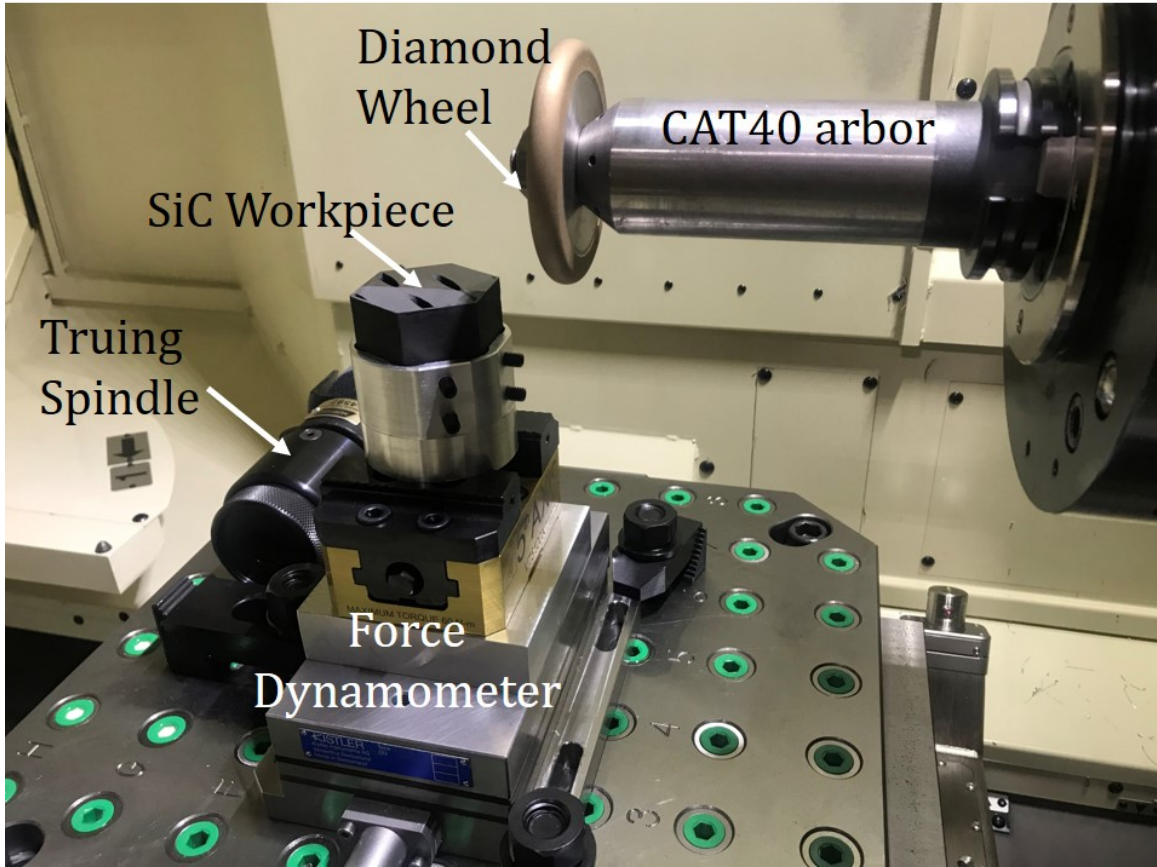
Experimental setup showing the workpiece, fixturing, force dynamometer, and grinding wheel.
